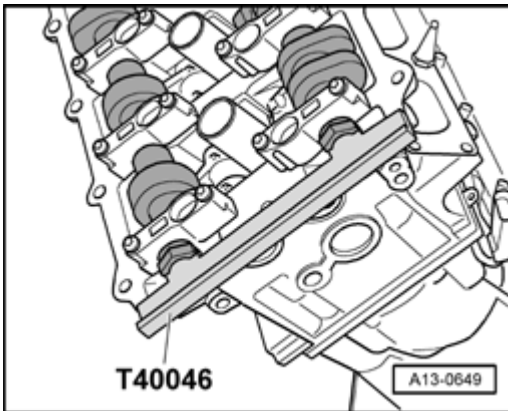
Removing/Inserting Camshaft Locator T40046 From/Into Camshafts Of Right Cylinder Head
